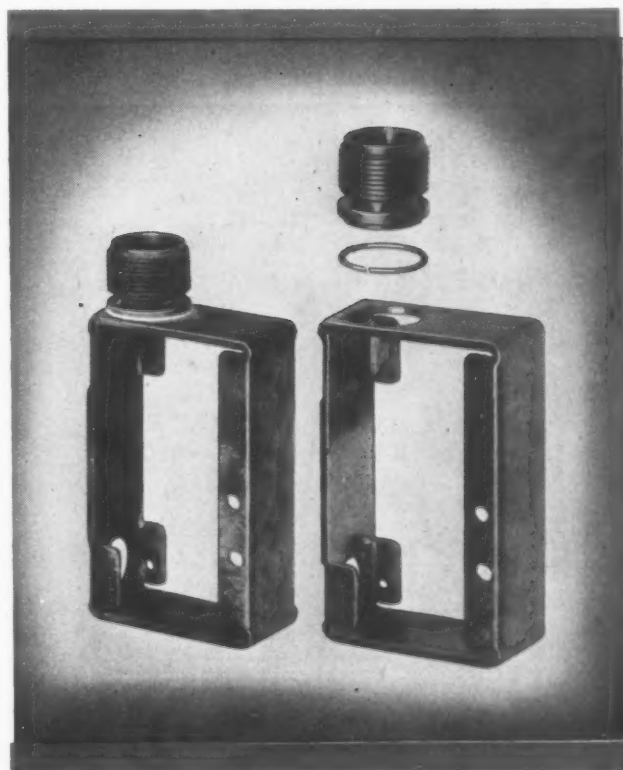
Micro-switch Enclosure after being Brazed (at Left) and Parts Used in Assembly, Including Alloy Ring (at Right)
